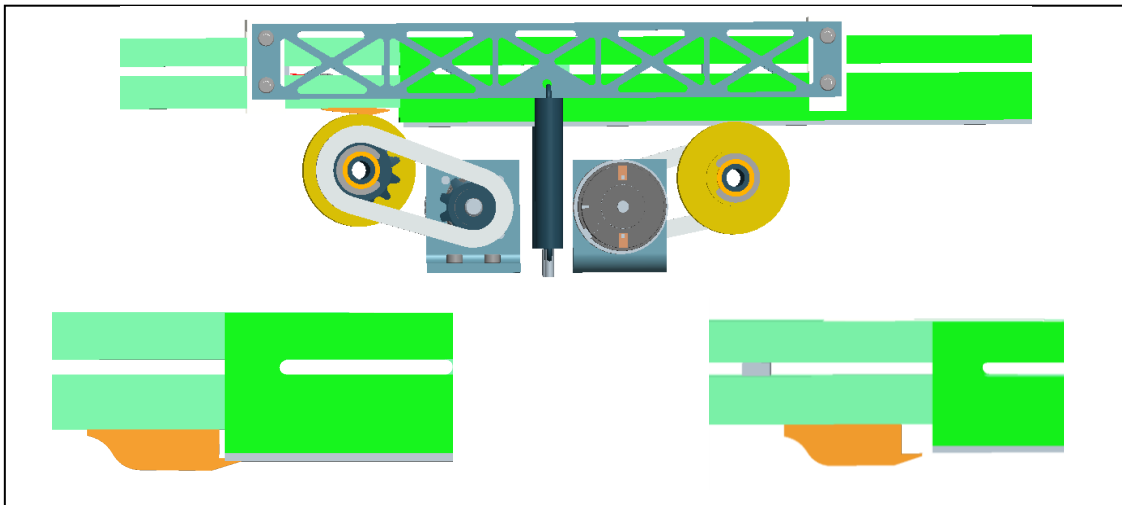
Top: Rollers can be driven in the same direction to move the ladder, and in opposite directions to drive segments together or apart. Bottom: When the lock is in position, the lip prevents the roller from depressing it; when the lock is positioned away from the next segment, the roller will depress it and allow the segment to be collapsed into the next segment.
